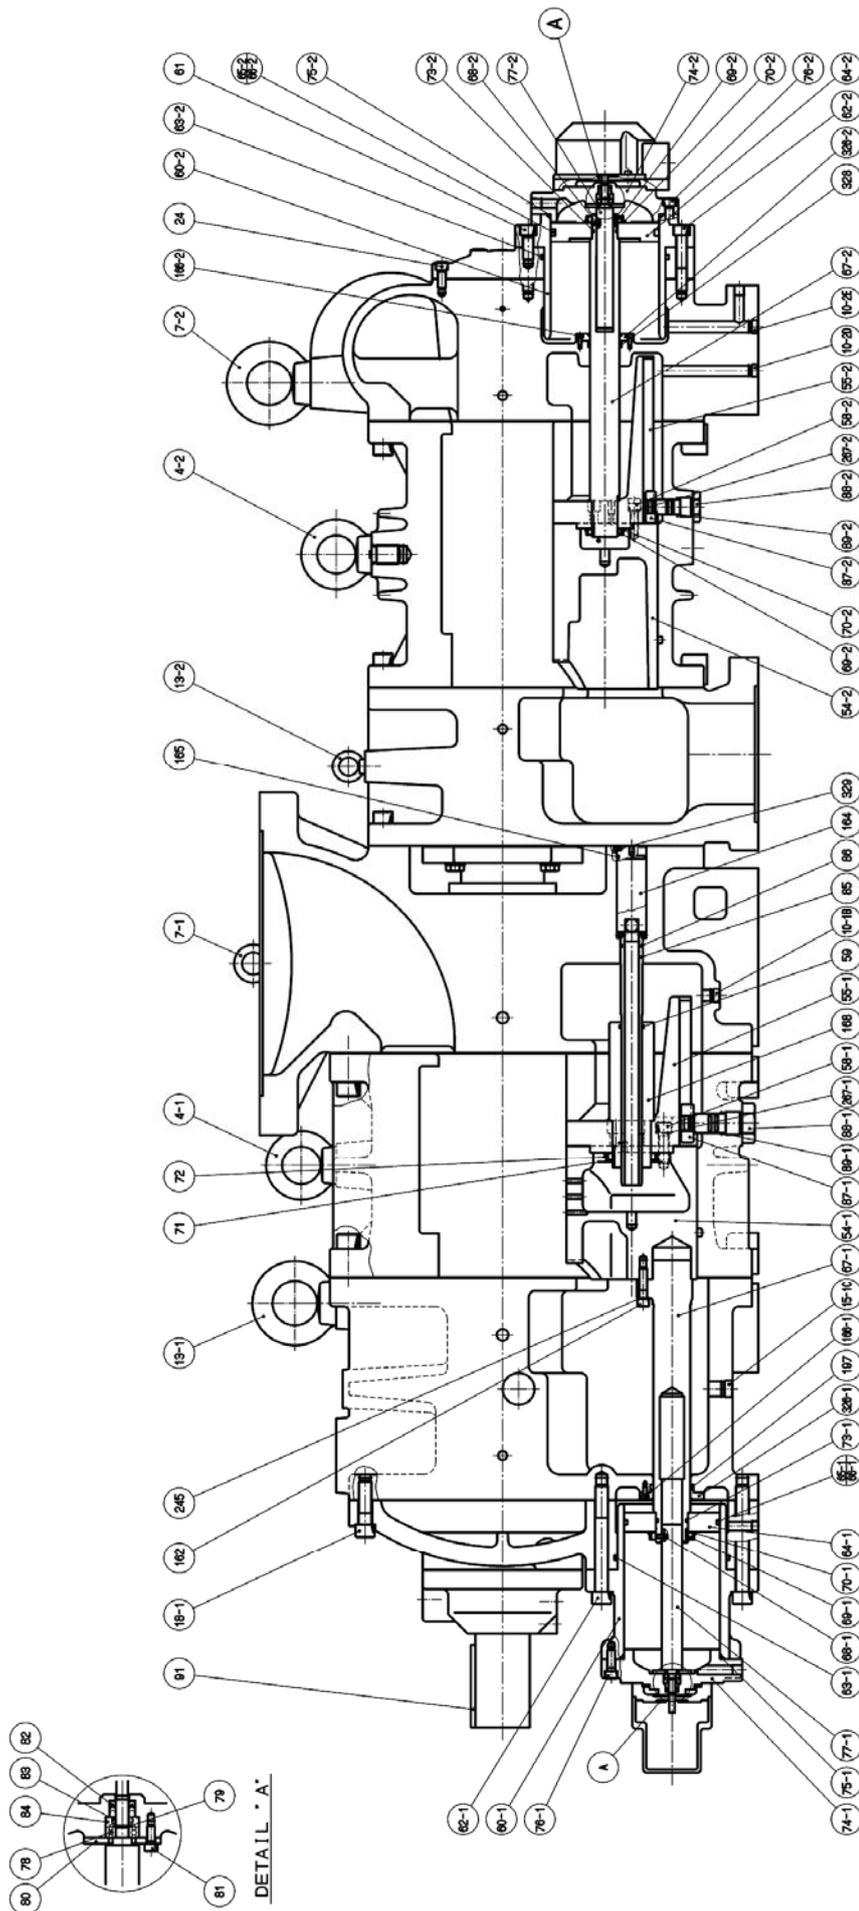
3225SLC Assembly Sectional View (Vertical)
